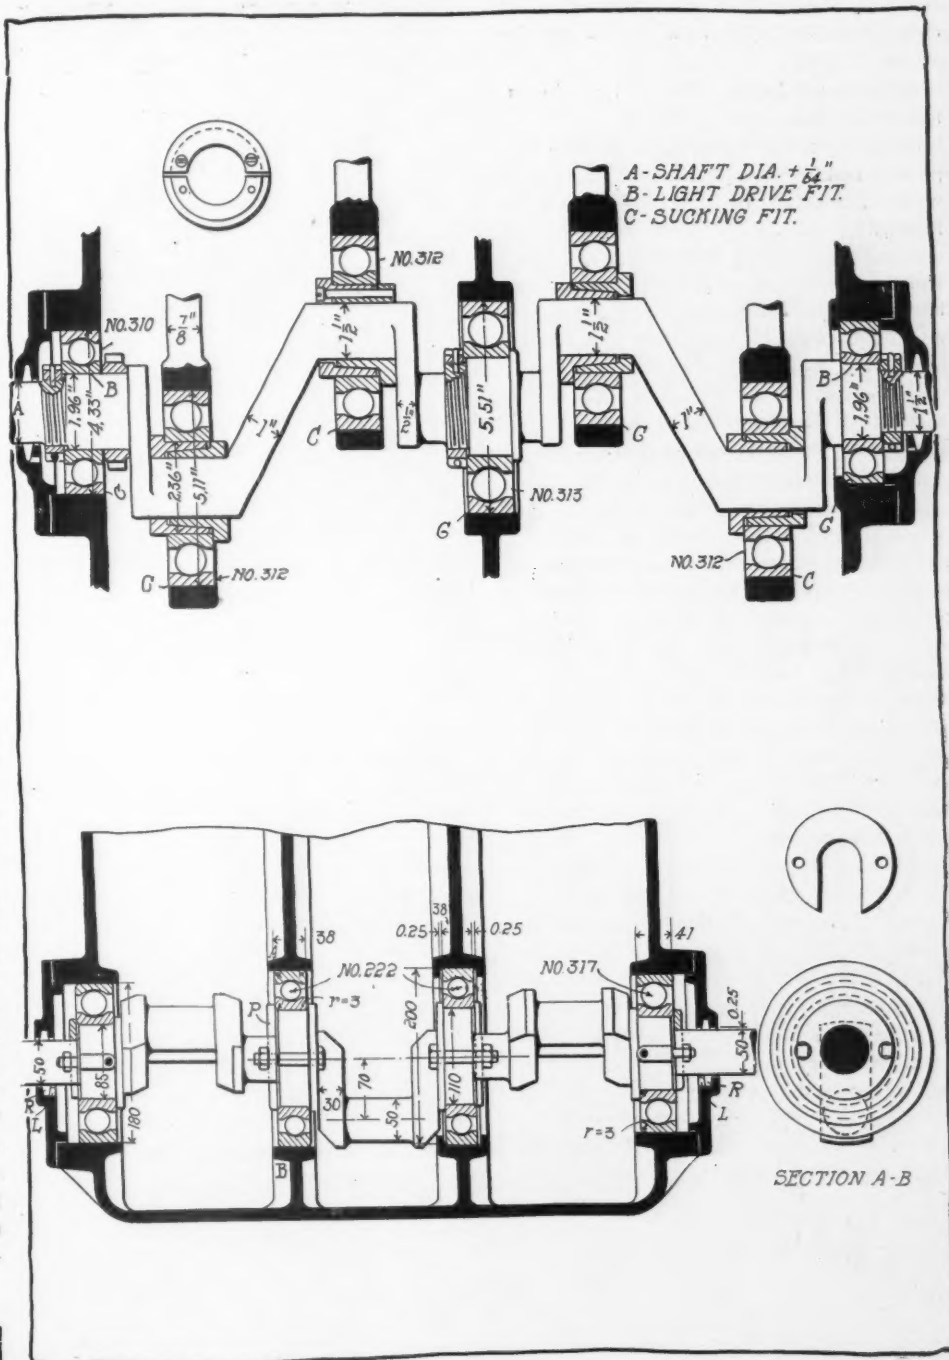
PECULIAR SHAPED CRANKSHAFT WITH CONNECTING RODS, ALSO ON BALL BEARINGS
